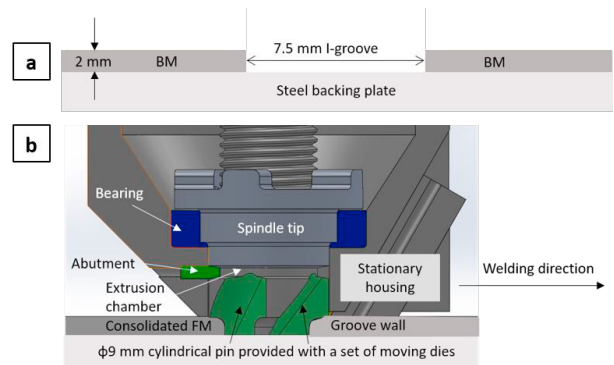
Schematic and SolidWorks drawings highlighting the experimental set-up during butt welding of the 2 mm thin AA6060-T6 extruded profiles; (a) Transverse section showing the groove and base plate dimensions. (b) Longitudinal section through the extruder head and the weld with the rotating cylindrical pin in position within the groove and the closed stationary housing placed on the top.
